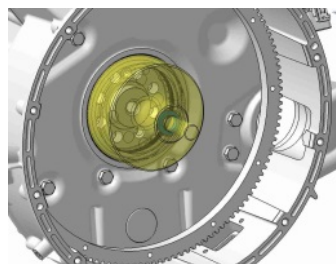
W457589014300 – Rear Crankshaft Seal Installer
